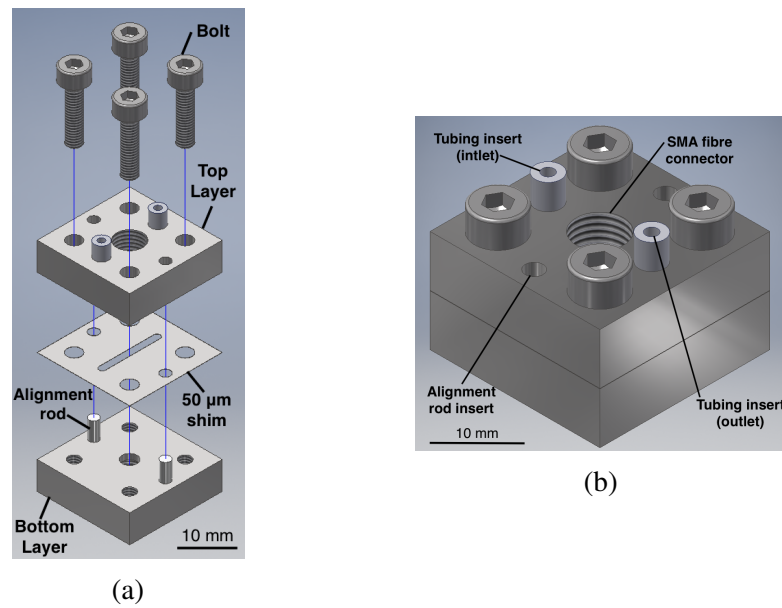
CAD models of device 2. (a) Unassembled and (b) assembled.
